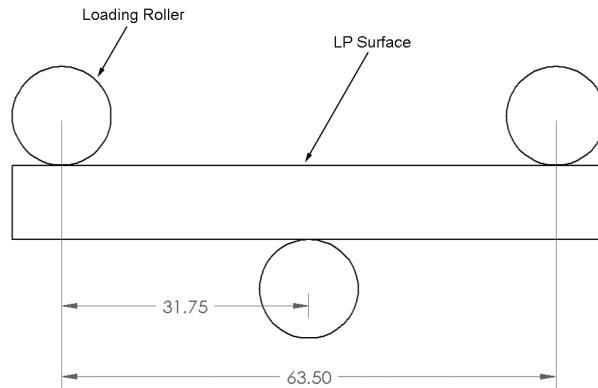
Three-point bend loading of the fatigue coupon, dimensions in mm
